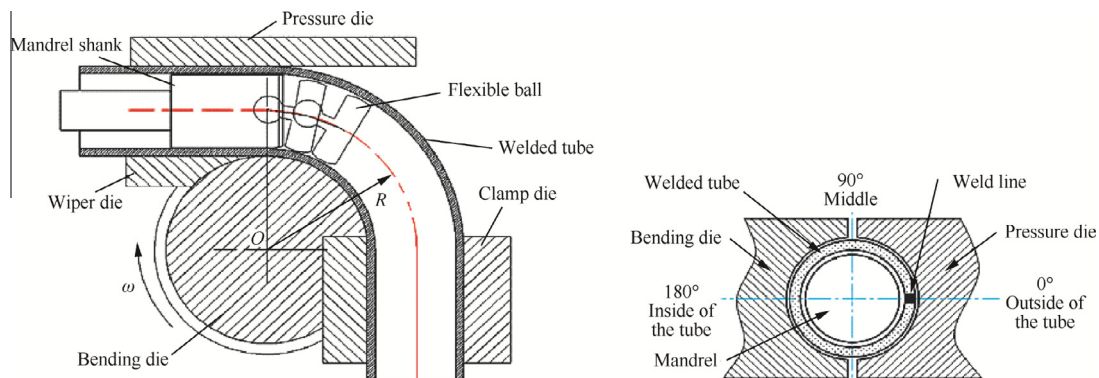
Schematic diagrams of welded tube NC bending process and weld position.<sup>28</sup>
